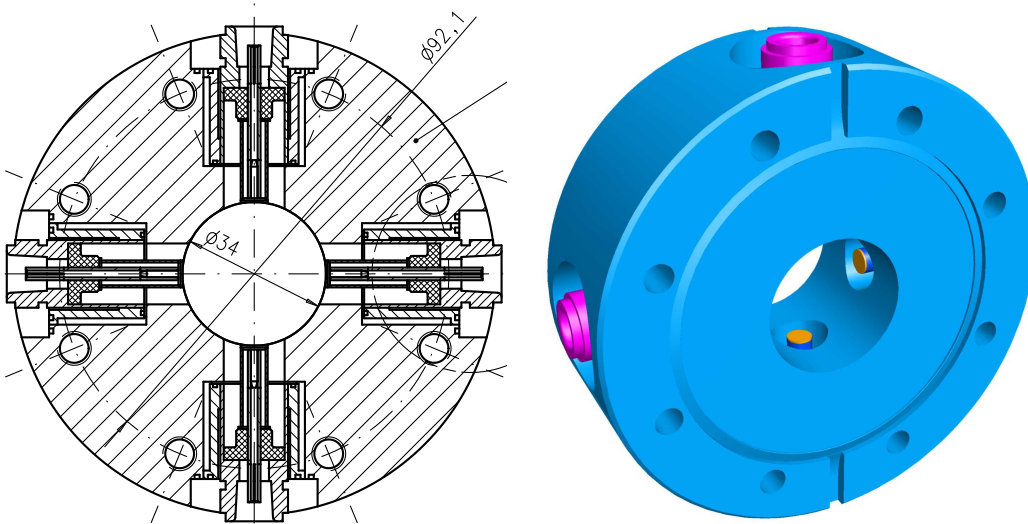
Technical drawing and 3D model of the button-type beam pick-up used for the bunch arrival-time measurements.
